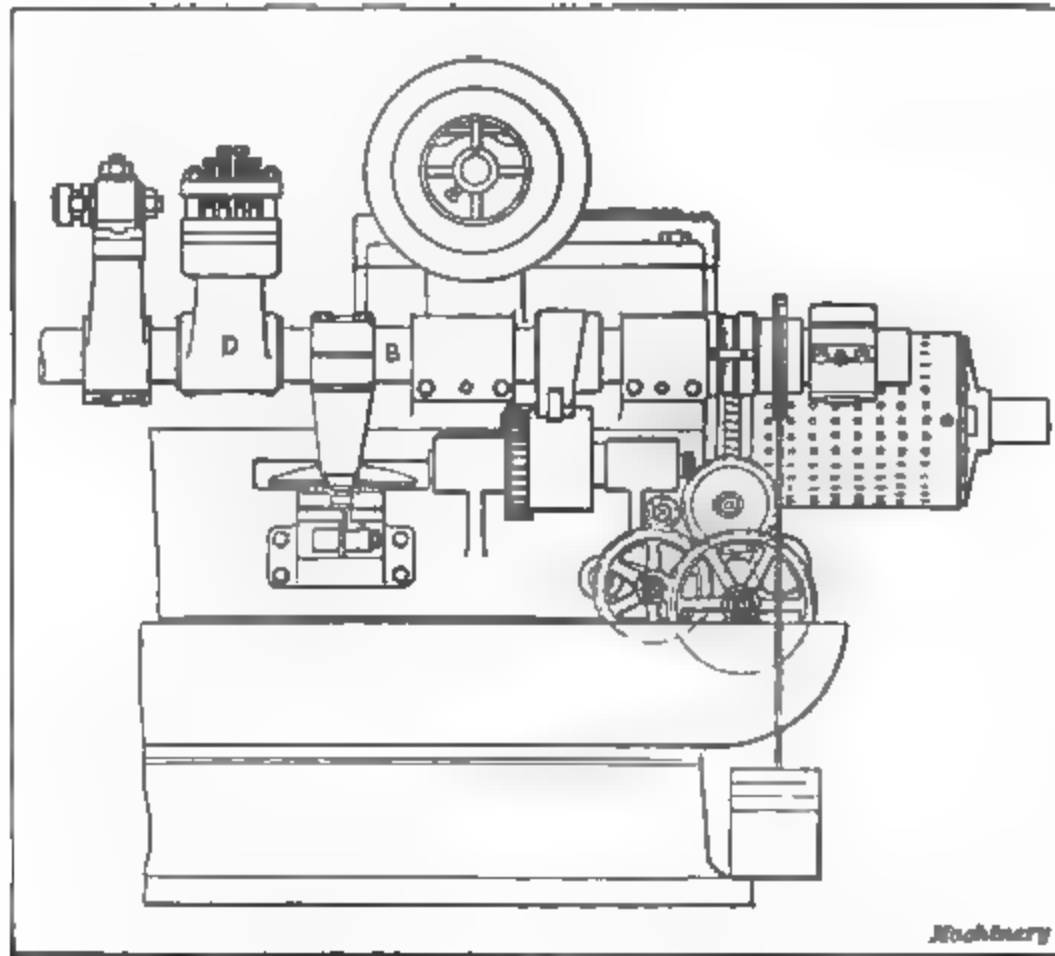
Rear View of Head End of Fay Automatic Lathe
